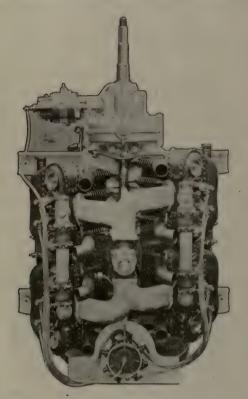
THE WOLSELEY EIGHT-CYLINDER 60 HORSE-POWER ENGINE. WEIGHT, 340 LBs. In this type the propeller is driven off the cam-shaft at half-engine speed.
